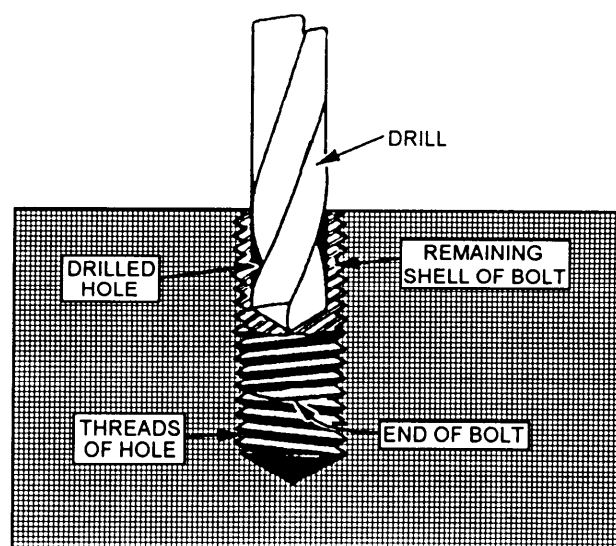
Removing a broken bolt and retapping the hole to the same size.
